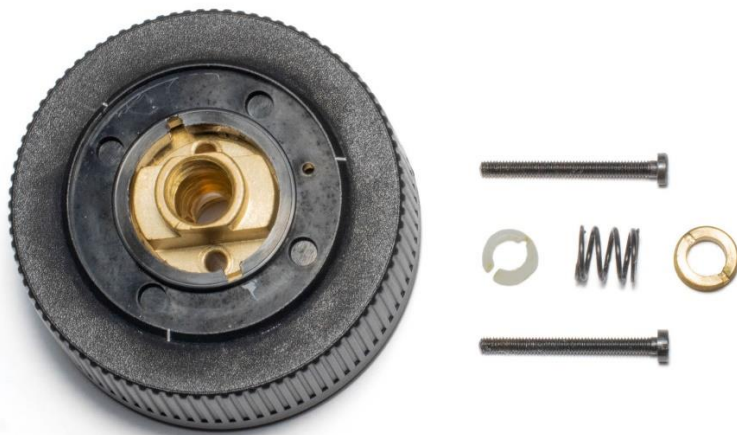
The right coarse focus knob with the screws and the removed parts of the fine focus axle bearing.
